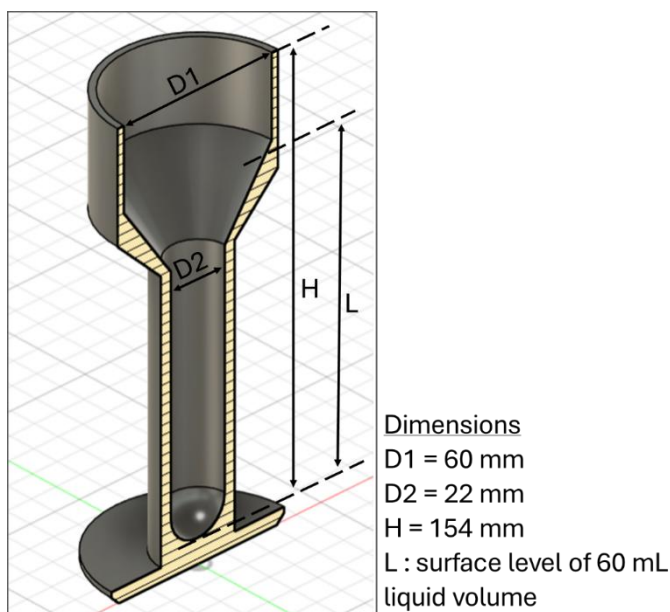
Design and dimensions of the 3D printed bubble column reactor.
